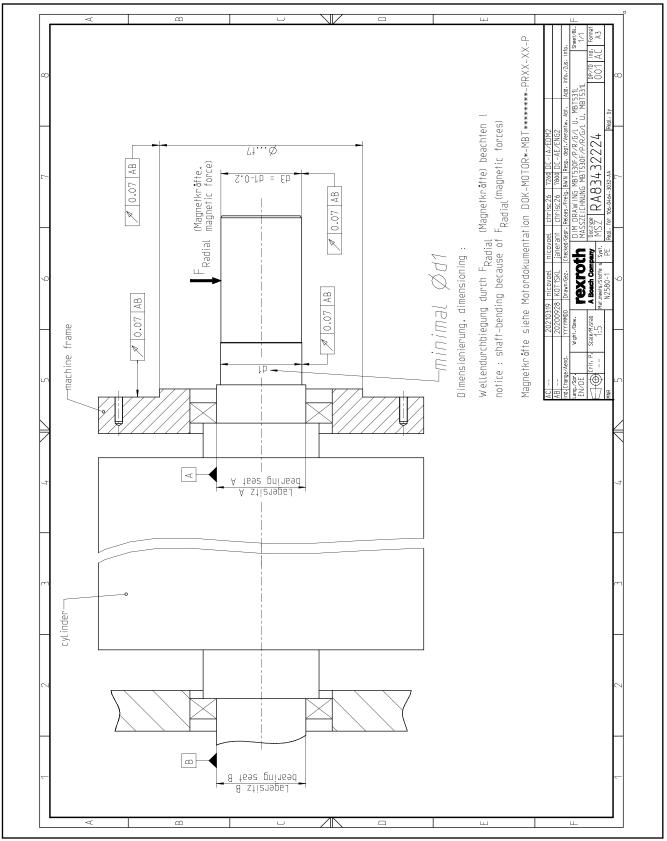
Dimensionsing of shaft for rotor MRT531L
